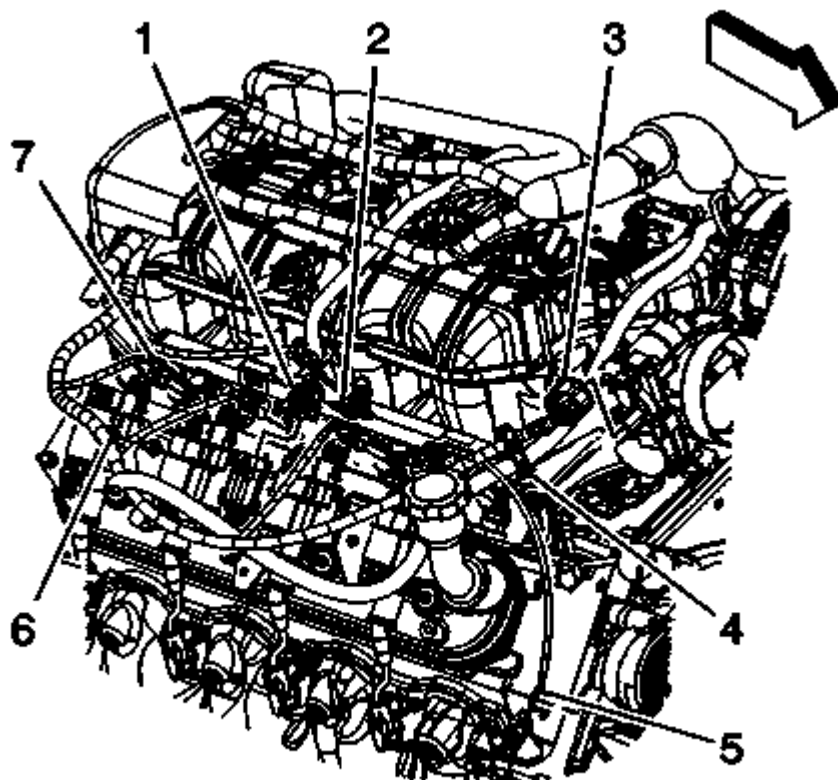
CPA Retainer, Engine Harness Electrical Connectors And Harness Clips
